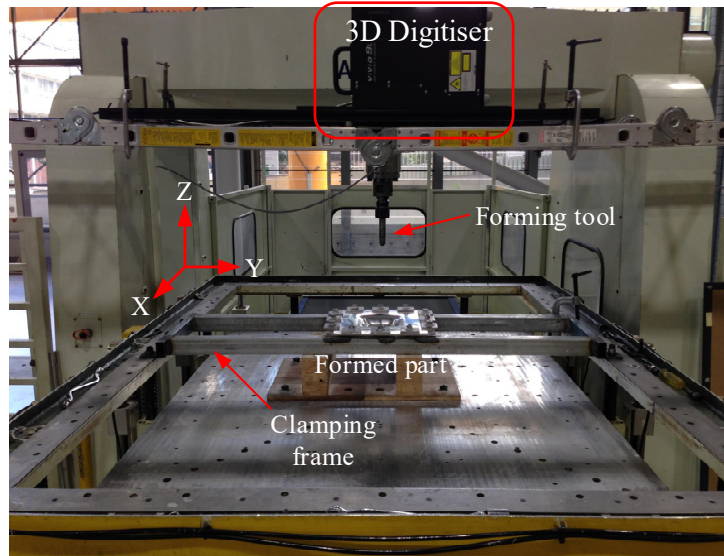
The AMINO® DLNC-PC ISF Machine equipped with a 3D Digitiser.
